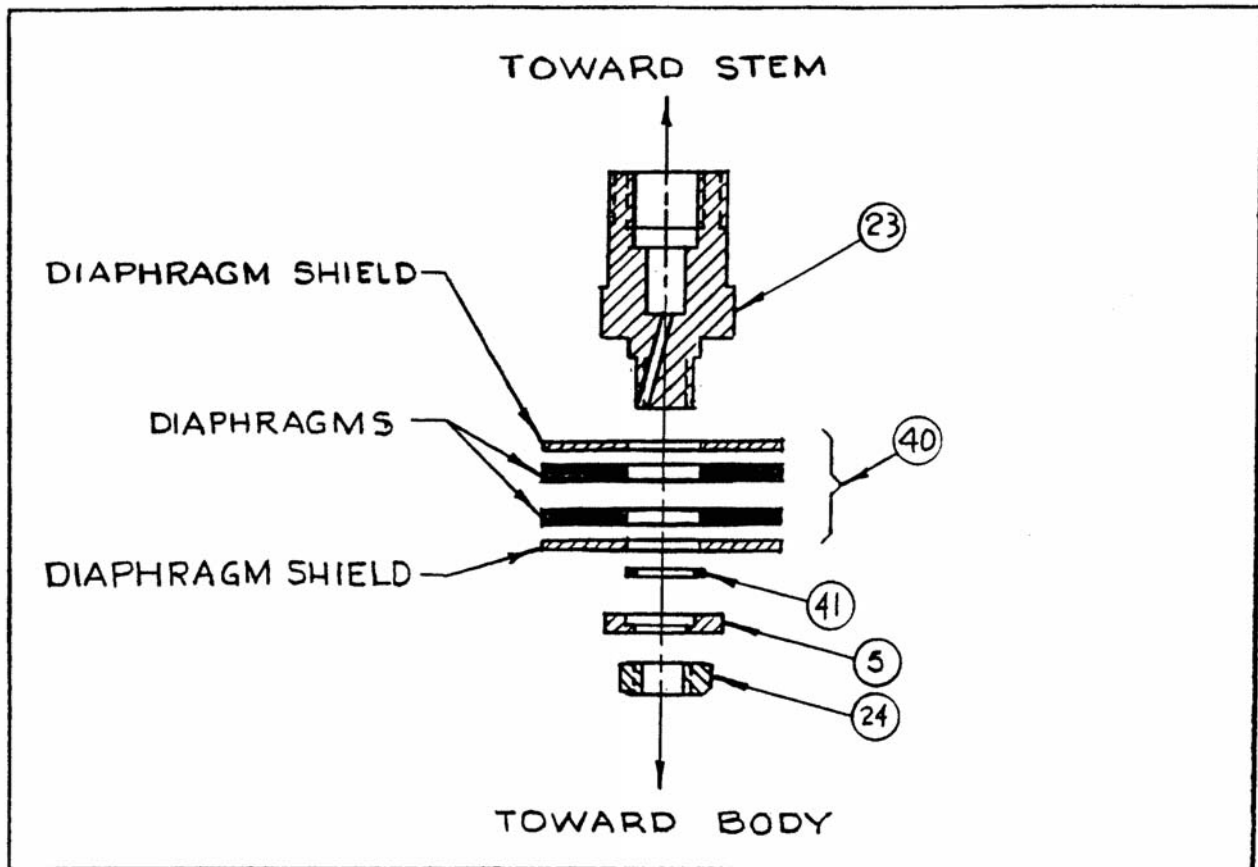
DIAPHRAGM BOLT SUBASSEMBLY
